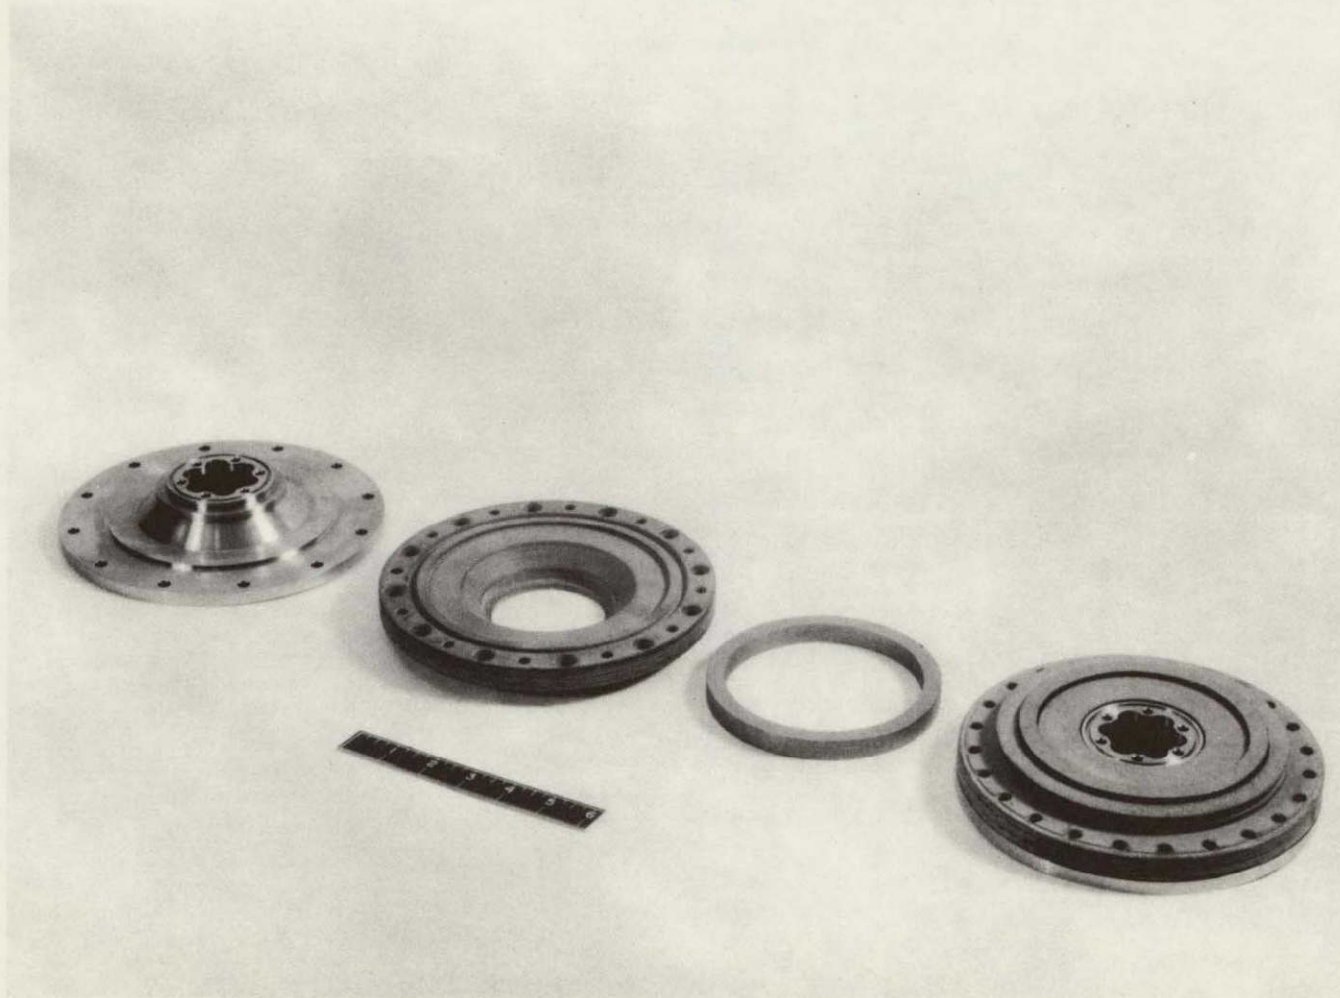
THRUST CHAMBER LINER ASSEMBLY
